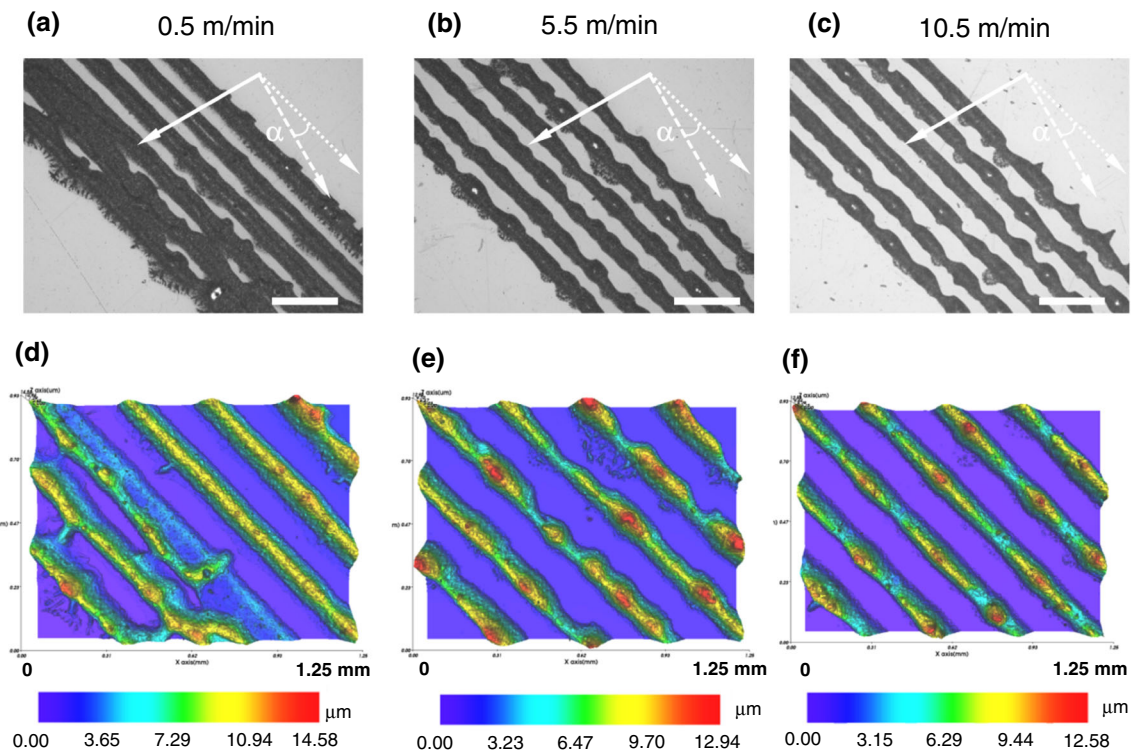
Optical images (a–c) and 3D profiles (d–f) of silver line patterns printed by rotogravure printing using a printing angle of 15° on a PET substrate, ink with a viscosity of 5 Pa·s, and printing speeds of 0.5, 5.5, and 10.5 m/min, respectively. The dashed and continuous lines indicate the directions perpendicular to and in line with the printing direction, respectively. The yellow bars along the printed lines indicate the lengths over which the thickness was profiled. The white scale bar represents 500 μm (Color figure online)
